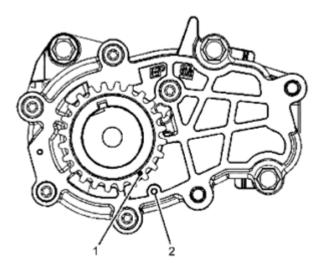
Aligning Circle Mark Crankshaft Timing Sprocket And Oil Pump Courtesy of SUZUKI OF AMERICA CORP.
